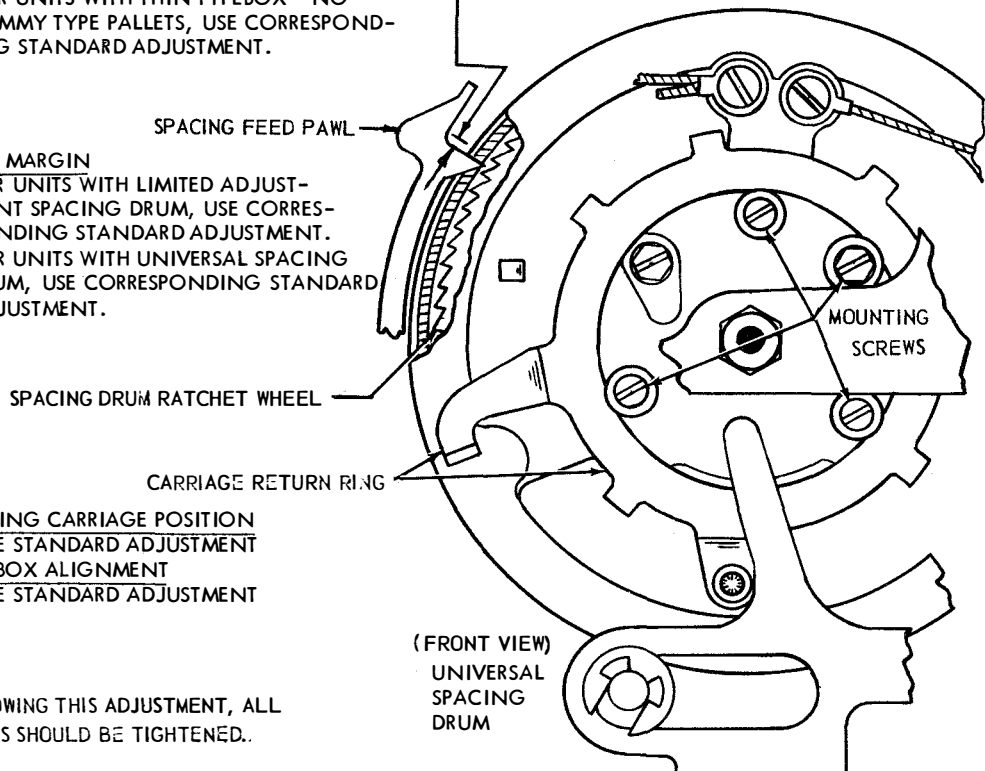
TYPING UNIT, PLATEN AND SPACING MECHANISM
